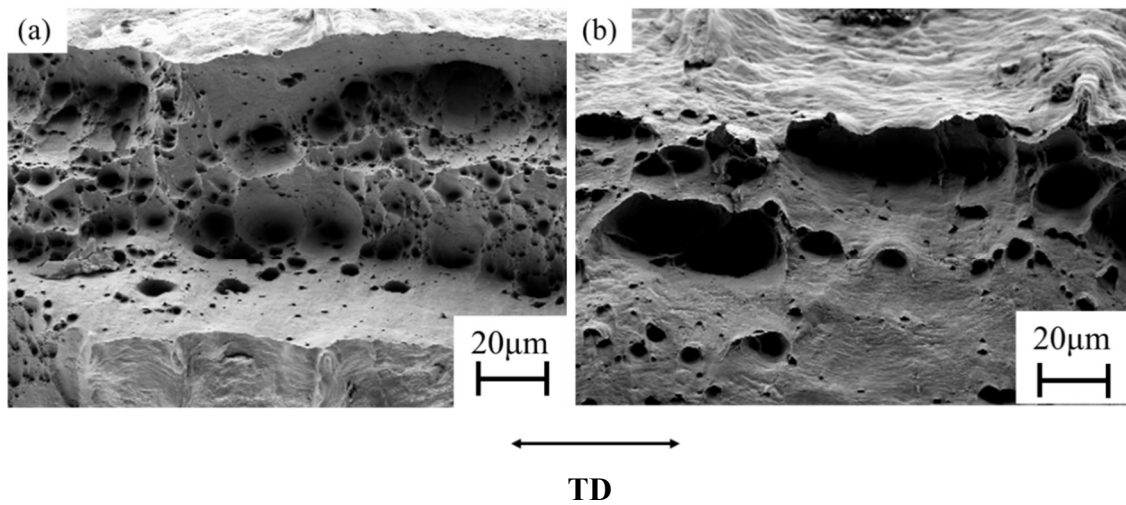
SE images of fractured surfaces of (a) IF steel and (b) industrial pure iron.
